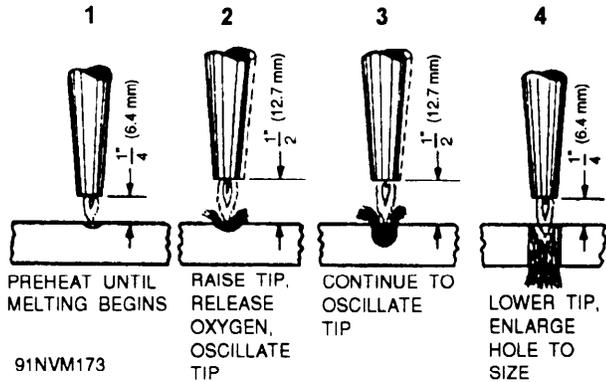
Piercing a hole with an oxyacetylene cutting torch.
